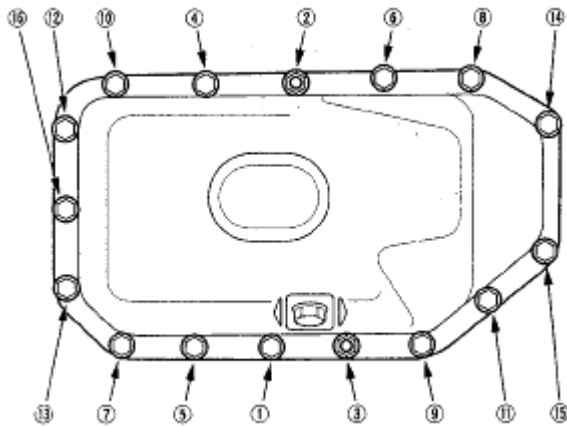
Identifying Oil Pan Bolt/Nut Tightening Sequence
